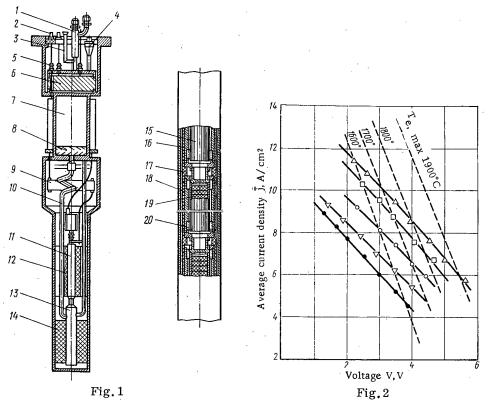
Construction of experimental assembly: 1) valve; 2) electric connector; 3) vacuum gauge; 4) connecting plug; 5) lead-in; 6) biological shield; 7) ion pump; 8) cesium trap; 9) shunt; 10) exhaust tube; 11) generating channel; 12) collector heater; 13) cesium thermostat; 14) cesium thermostat heater; 15) emitter; 16) collector; 17) spacing ring; 18) insulation; 19) fuel pellet; 20) spacer.
